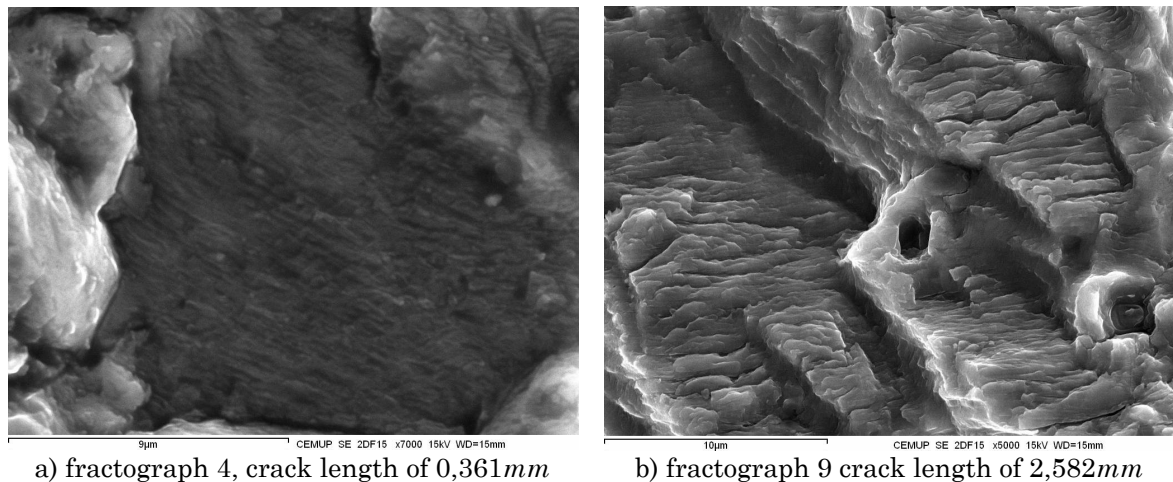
Fatigue striations for two crack lengths, AA6082-T6 MIG welded specimen.
